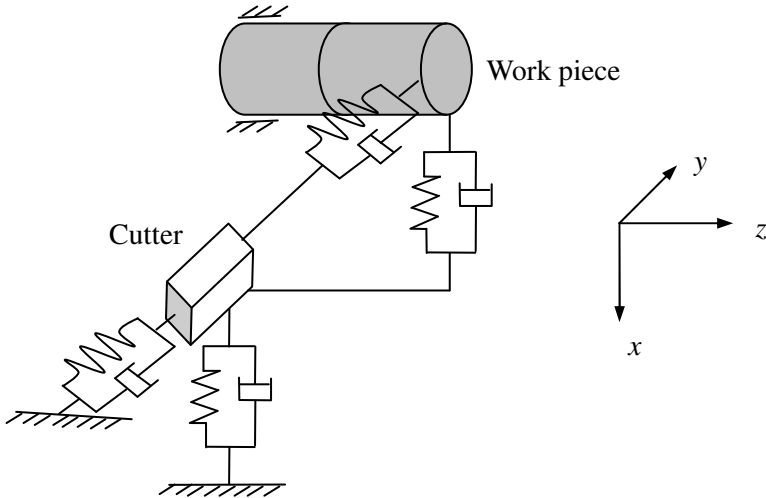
Mathematical model of a coupled workpiece-cutter system.
